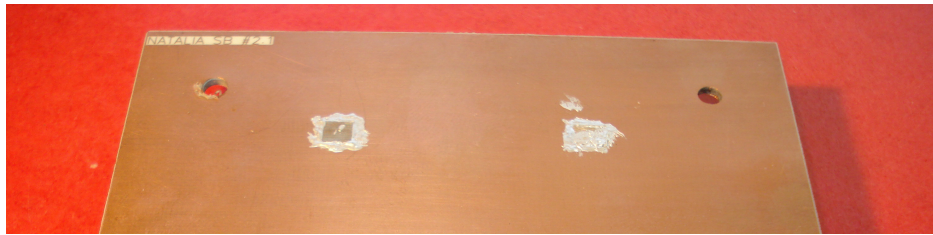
Glue removal from the Soldering Maneuver Hole using a Flattened Tip Drill.
